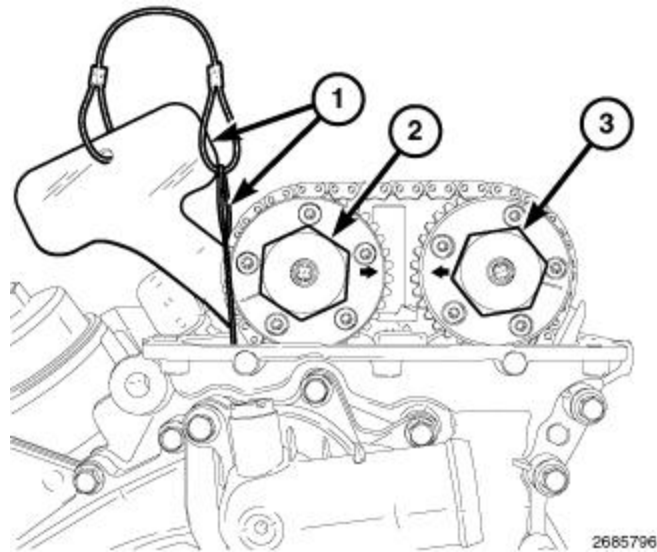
Pin, Rack, Timing Chain Holder & Oil Control Valves
